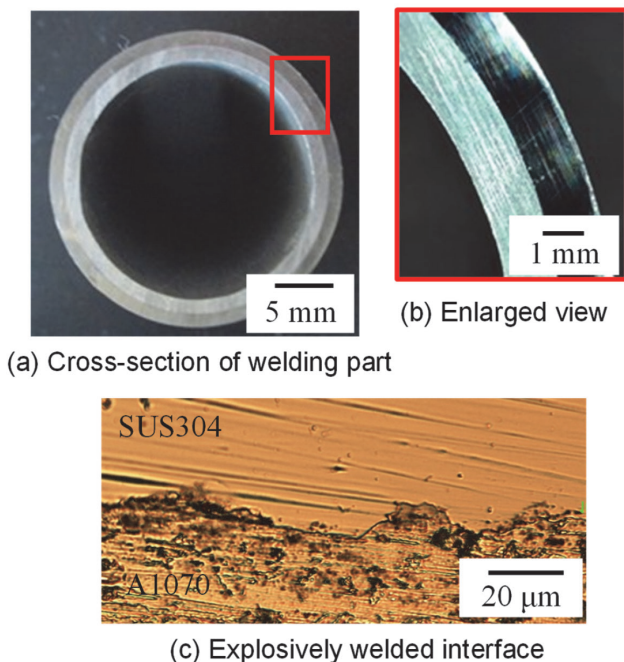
Welded part for stainless steel 304 and aluminum alloy 1070. (Online version in color.)
